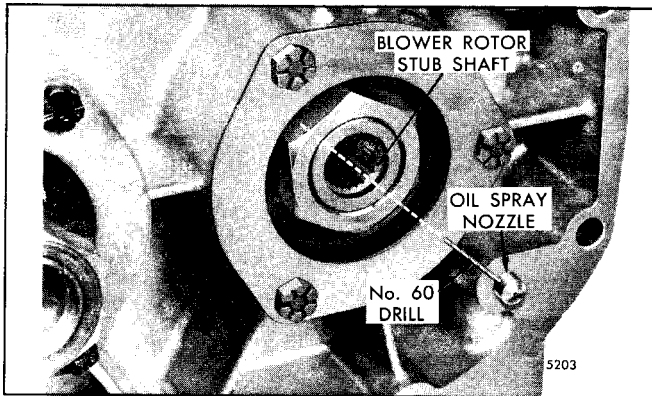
Positioning Blower Spray Nozzle (Former)
